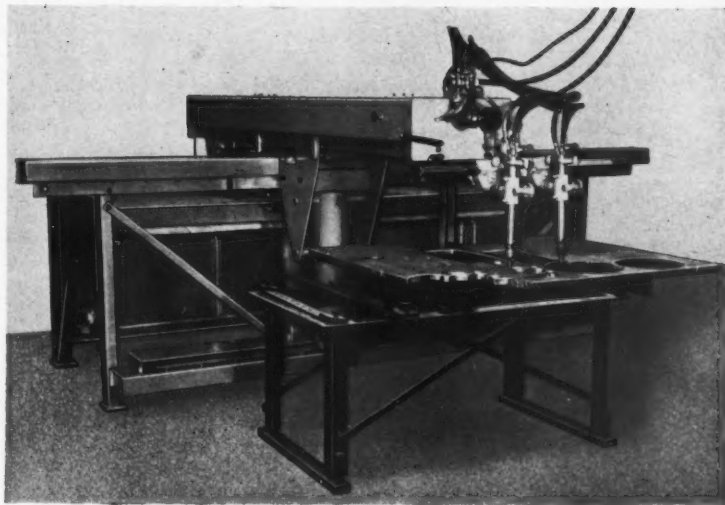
S.I.F. 75 Cutamatic oxy-flame cutting machine
